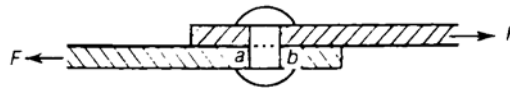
Shearing stresses in a rivet; shearing forces F is transmitted over the face ab of the rivet
